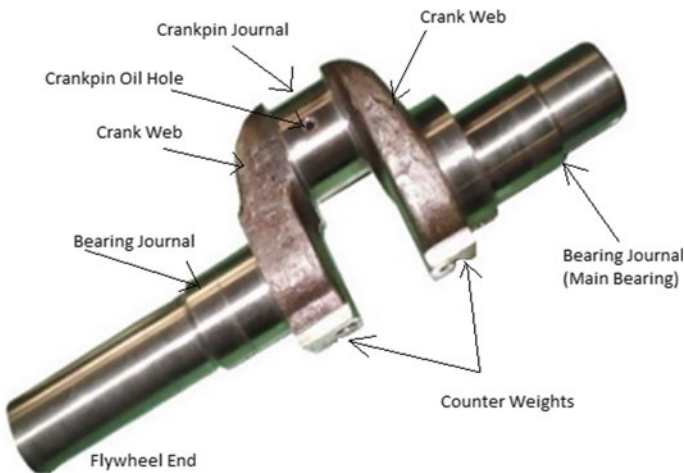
Forged steel single-cylinder diesel engine crankshaft [9, 11] Source Forge & Forge Pvt. Ltd. Rajkot
